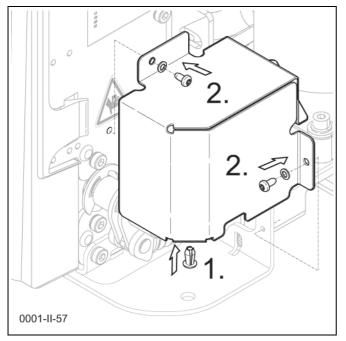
Mounting circuit-breaker shaft cover (optional)
